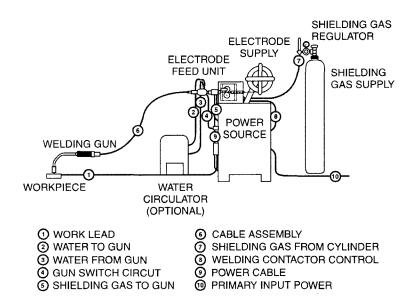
Diagram of Gas Metal Arc Welding Equipment
